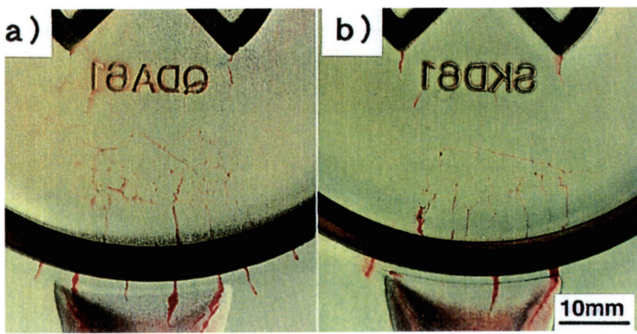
Comparison of heat checking occurred on the surface of dies between steel A and B. a) Steel A b) Steel B
